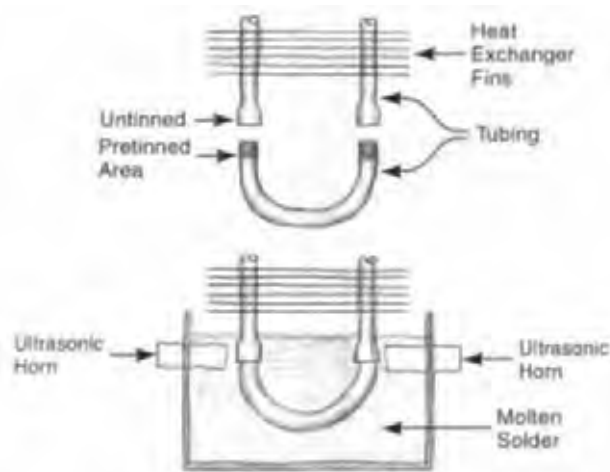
A1g Ultrasonic soldering of return bends of an aluminum heat-exchanger assembly. Ultrasonic vibrations from the horns, transmitted to the molten solder, break up oxide coatings on the surface of the aluminum tubing and enable the solder to wet the surface without the use of flux.
